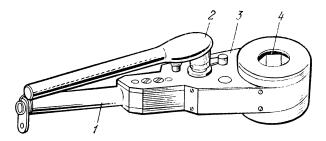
Tool for tightening the nuts on anchor bolts
